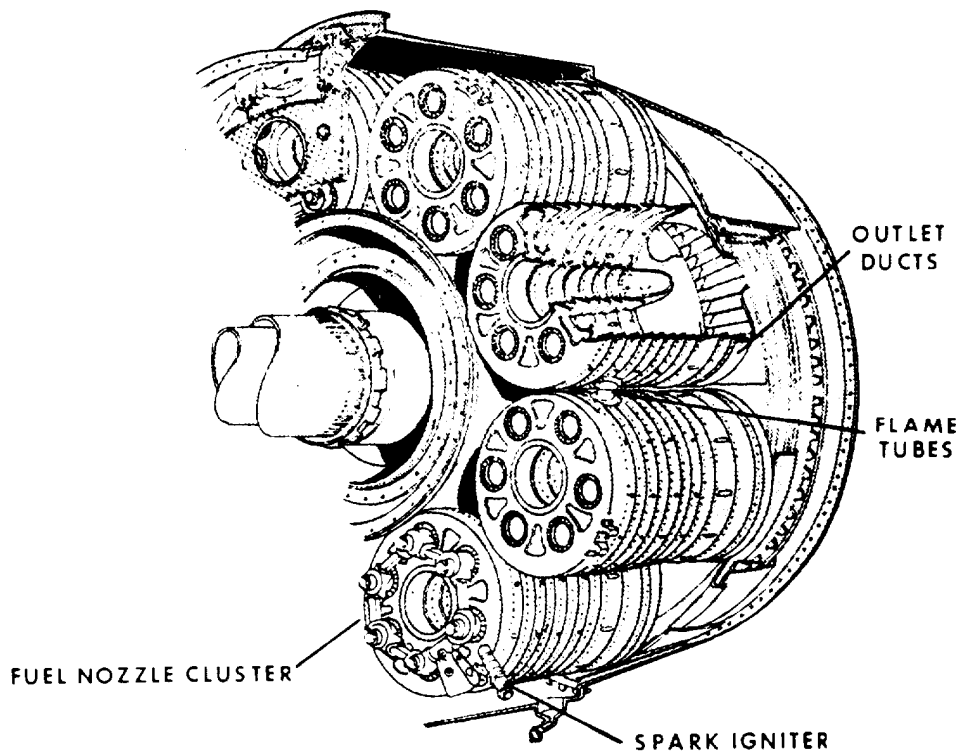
Can-annular combustion chamber components and arrangement.
